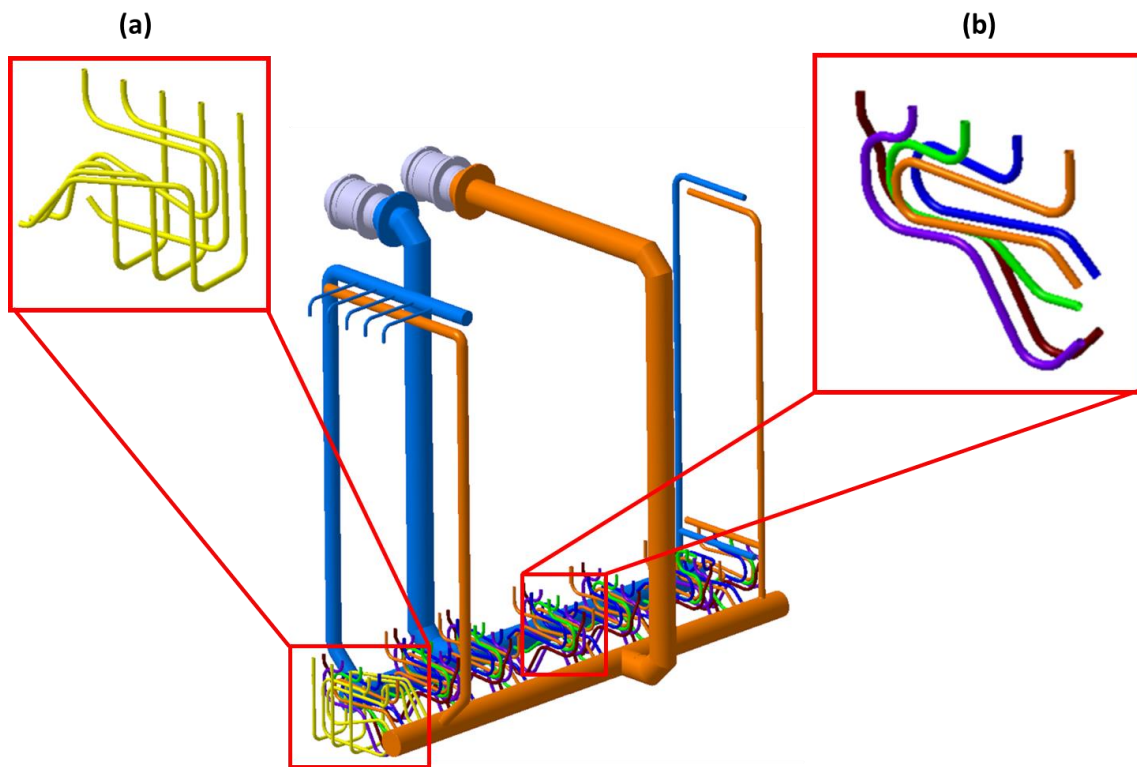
Expansion joints: magnifications of the two main groups. (a) Leading edge outlet expansion joints; (b) Panel inlet/outlet expansion joints
